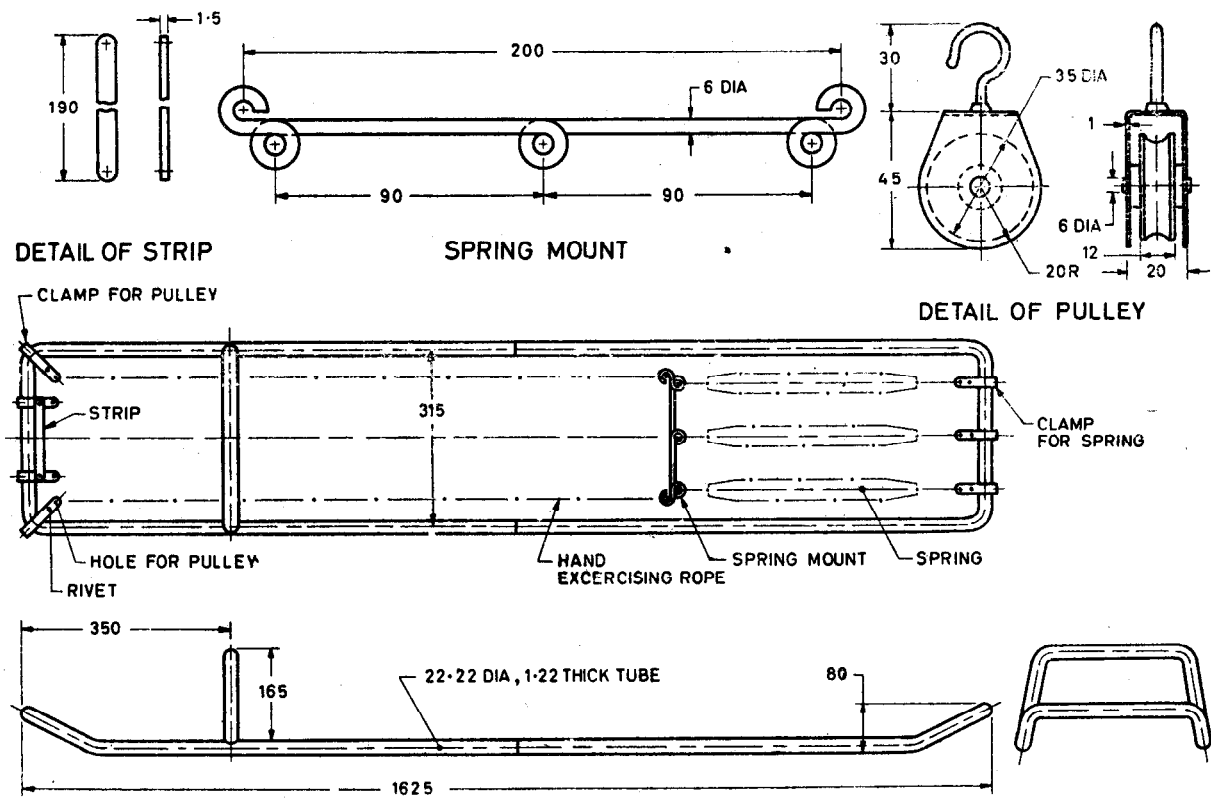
DETAIL OF INCLINING FRAME ASSEMBLY FOR SLIDING SEAT EXERCISER
